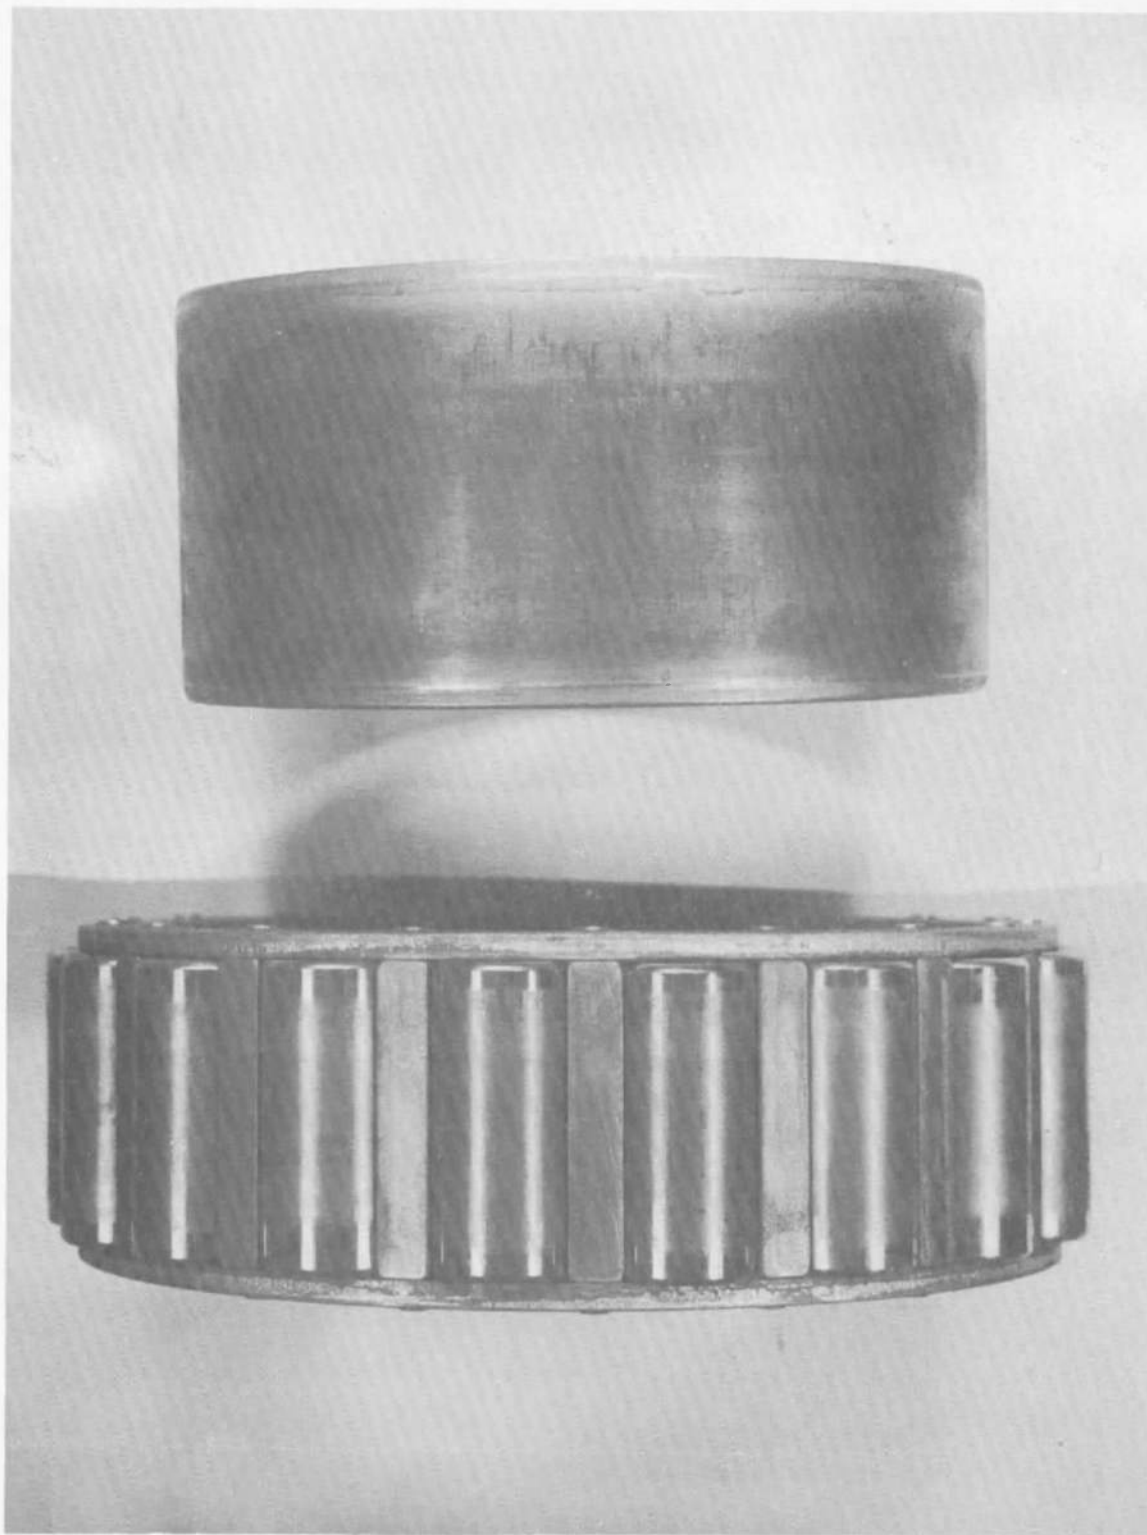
Test No. 4 (one of 4 bearings) – View of I.R. and Roller-Cage Assembly from Cylindrical Bearing – Note Effectiveness of MaS_2 + Graphite + Silicate Coating on Parts – Rollers were Not Initially Coated but Now have Uniform Transfer of Coating on Surface
